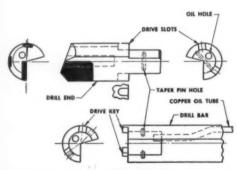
Wear strip detachable type of drill and mating socket in a Pratt & Whitney drill bar.
